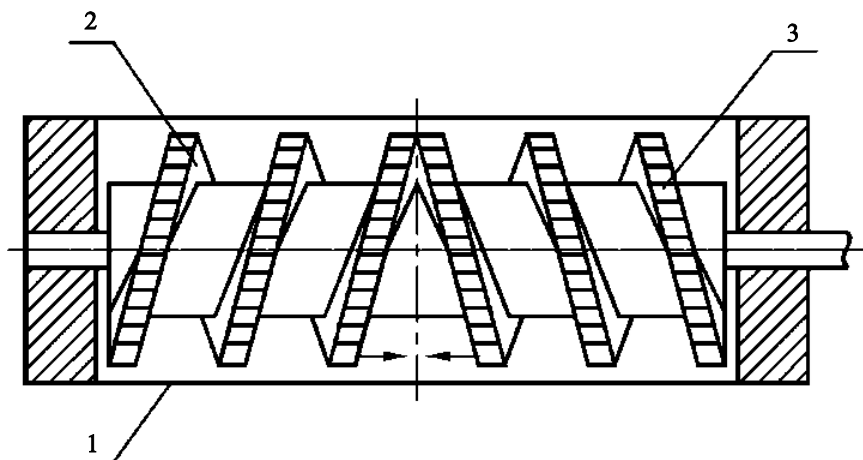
Extruder device with screw, on which the teeth are cut [23]
